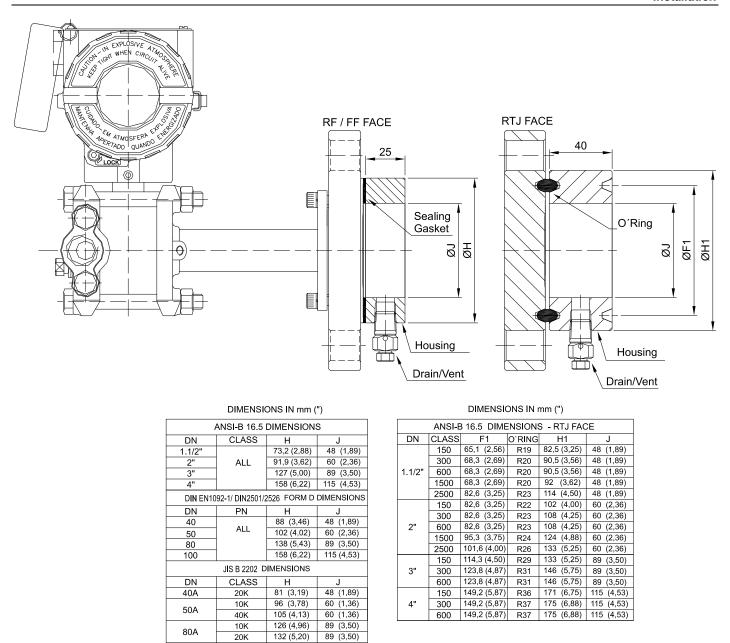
(d) - Dimensional Drawing and Mounting Position - Flanged Pressure Transmitter with Housing
